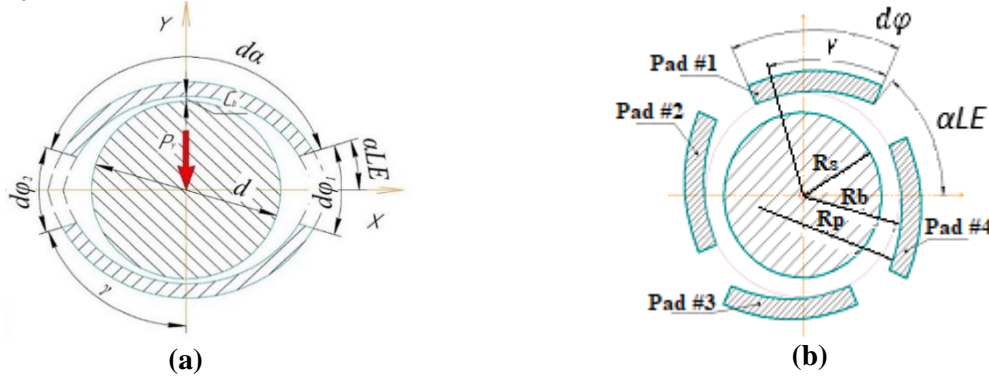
Bearing schemes: (a) Elliptical and (b) Tilting pad Bearings
